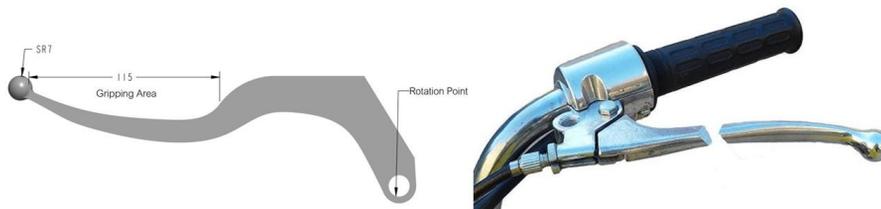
Motorcycle handle lever main geometry and failure after impact.
